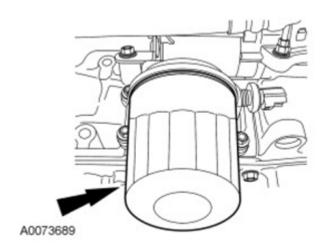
Locating Engine Oil Filter Courtesy of FORD MOTOR CO.
